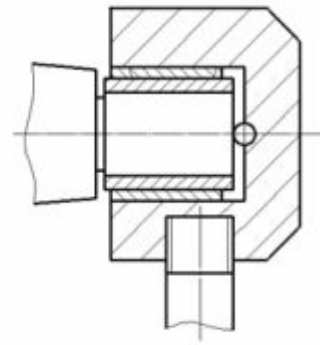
Laboratory stand for investigating friction in slide bearings, diagram of slide bearing
